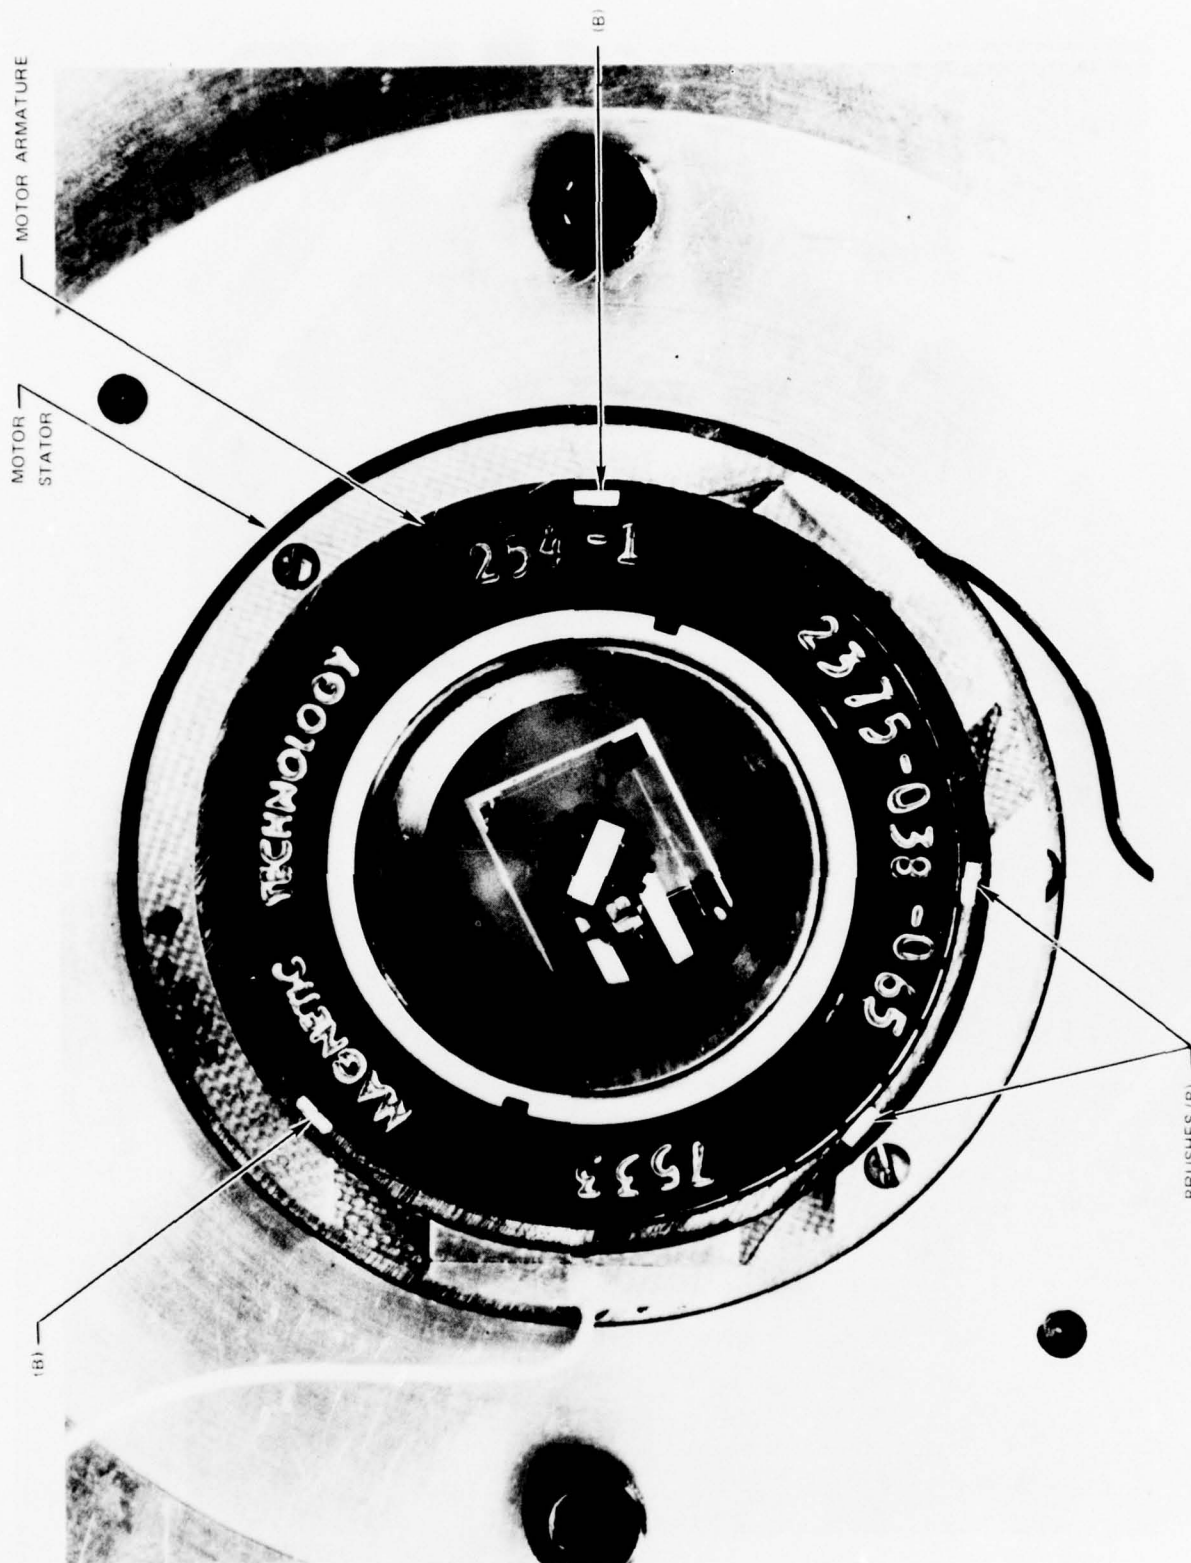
Hollow Torque Motor (Installed on Derotator) Cylinder Housing
